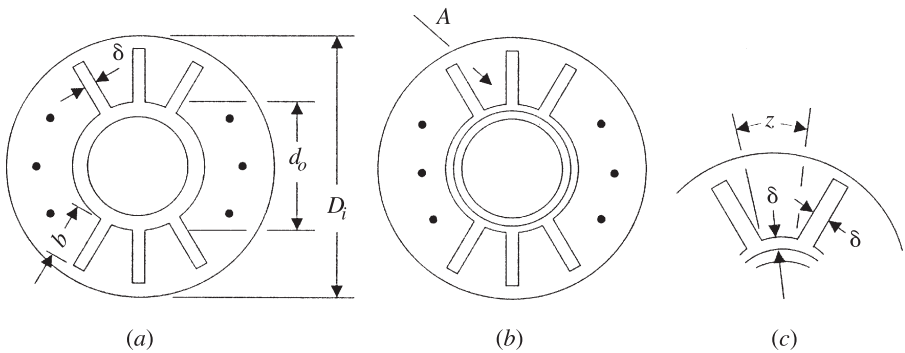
Configurations to be used for the determination of the flow area, wetted perimeter, and surfaces for the annular region in the double-pipe heat exchanger: (a) extruded fins; (b) welded U-fins; (c) detail of two welded U-fins. (From Kraus et al., 2001, with permission.)
